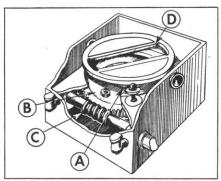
No. 102 cam case without traverse bar and driver, showing exploded view of adjuster and worm wheel.
